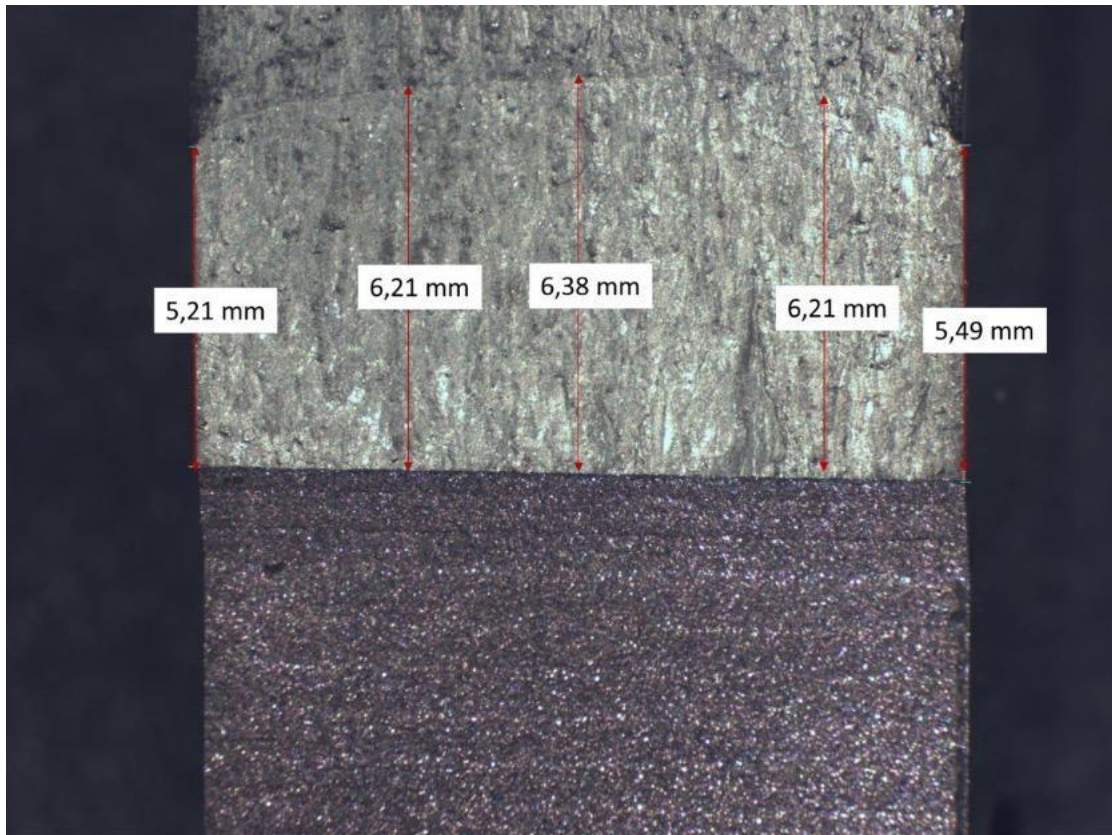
Fracture toughness crack measurement for 6.5 m/s 1
